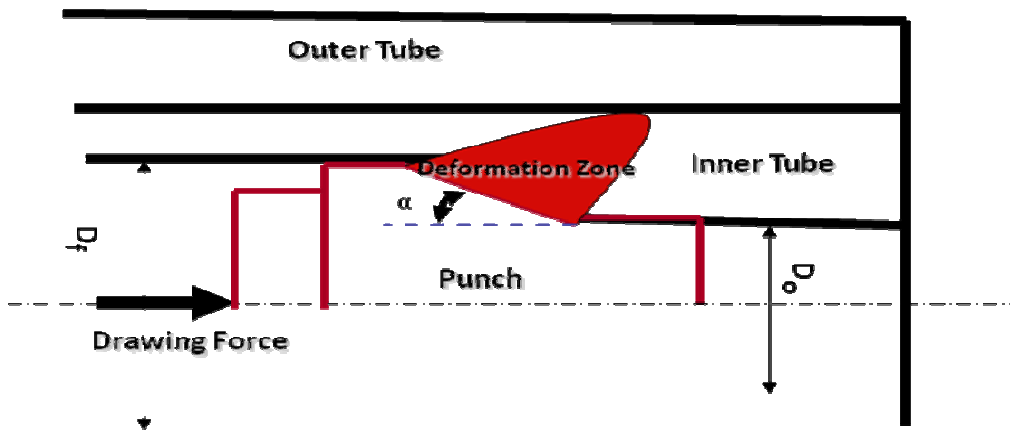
Schematic of the drawing process of Annular Target using Conical Punch
